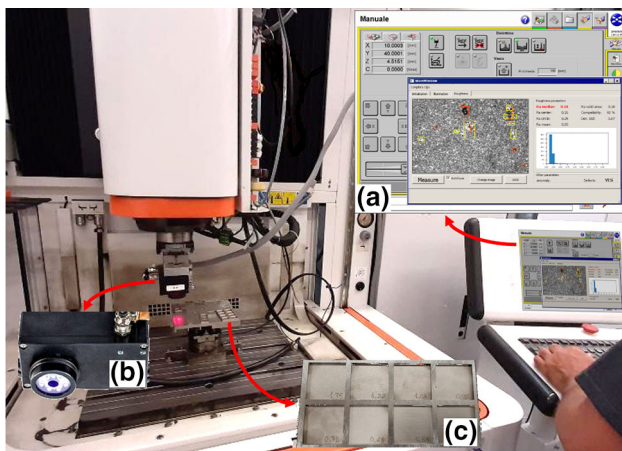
The automation system for measurement and inspection, Die-Sinking machine AgieCharmilles Form 200 by GF Machining Solutions a integrated GUI, b image acquisition system, and c workpiece
